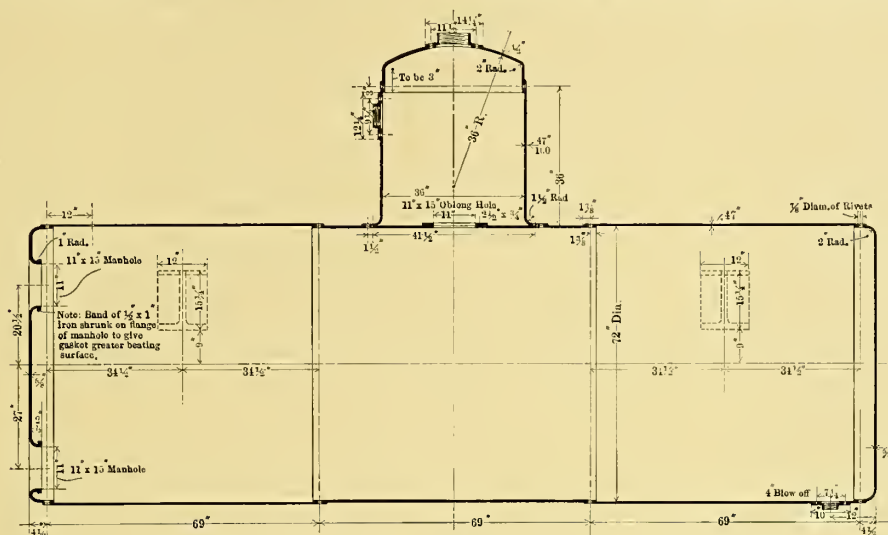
SHELL, HEADS AND DOME ASSEMBLED, SHOWING PRINCIPAL DIMENSIONS.
